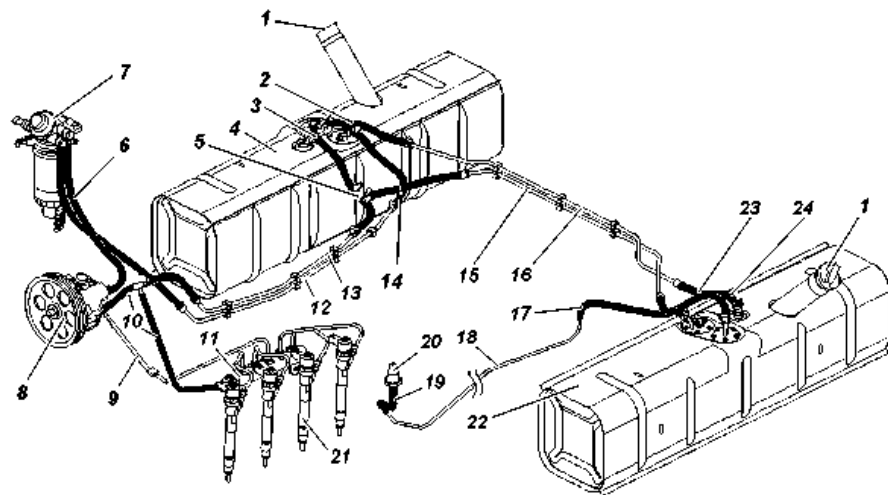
Scheme of engine fuel feeding; 1 –fuel tank plug; 2, 17, 19, 23, 24 - air-vapor hoses; 3 - fuel drain hose into the right tank; 4 –right fuel tank; 5 -jet pump; 6, 14 - fuel feeding hoses; 7 –fine fuel filter; 8 - high pressure fuel pump; 9 –fuel tube; 10 - fuel drain hose; 11 - fuel rail; 12 - fuel feeding tube; 13 - fuel drain tube; 15 –left tank to jet pump tube; 16, 18 - air-vapor tubes; 20 - tank valve; 21 -jets; 22 -left fuel tank
